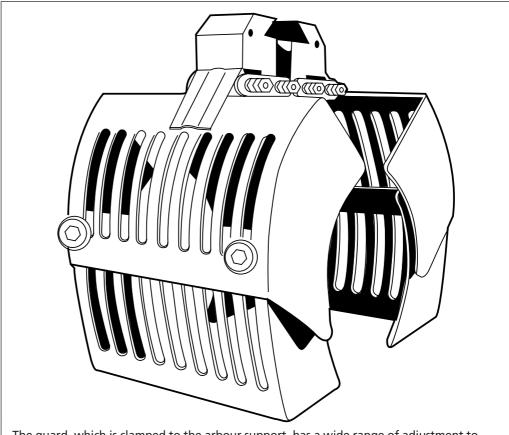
Adjustable guard for the cutters of horizontal milling machines
